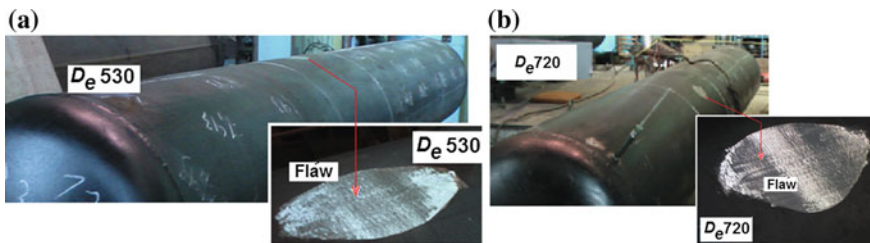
Photos of the specimens before repairing: a specimen K1; b specimen K2
